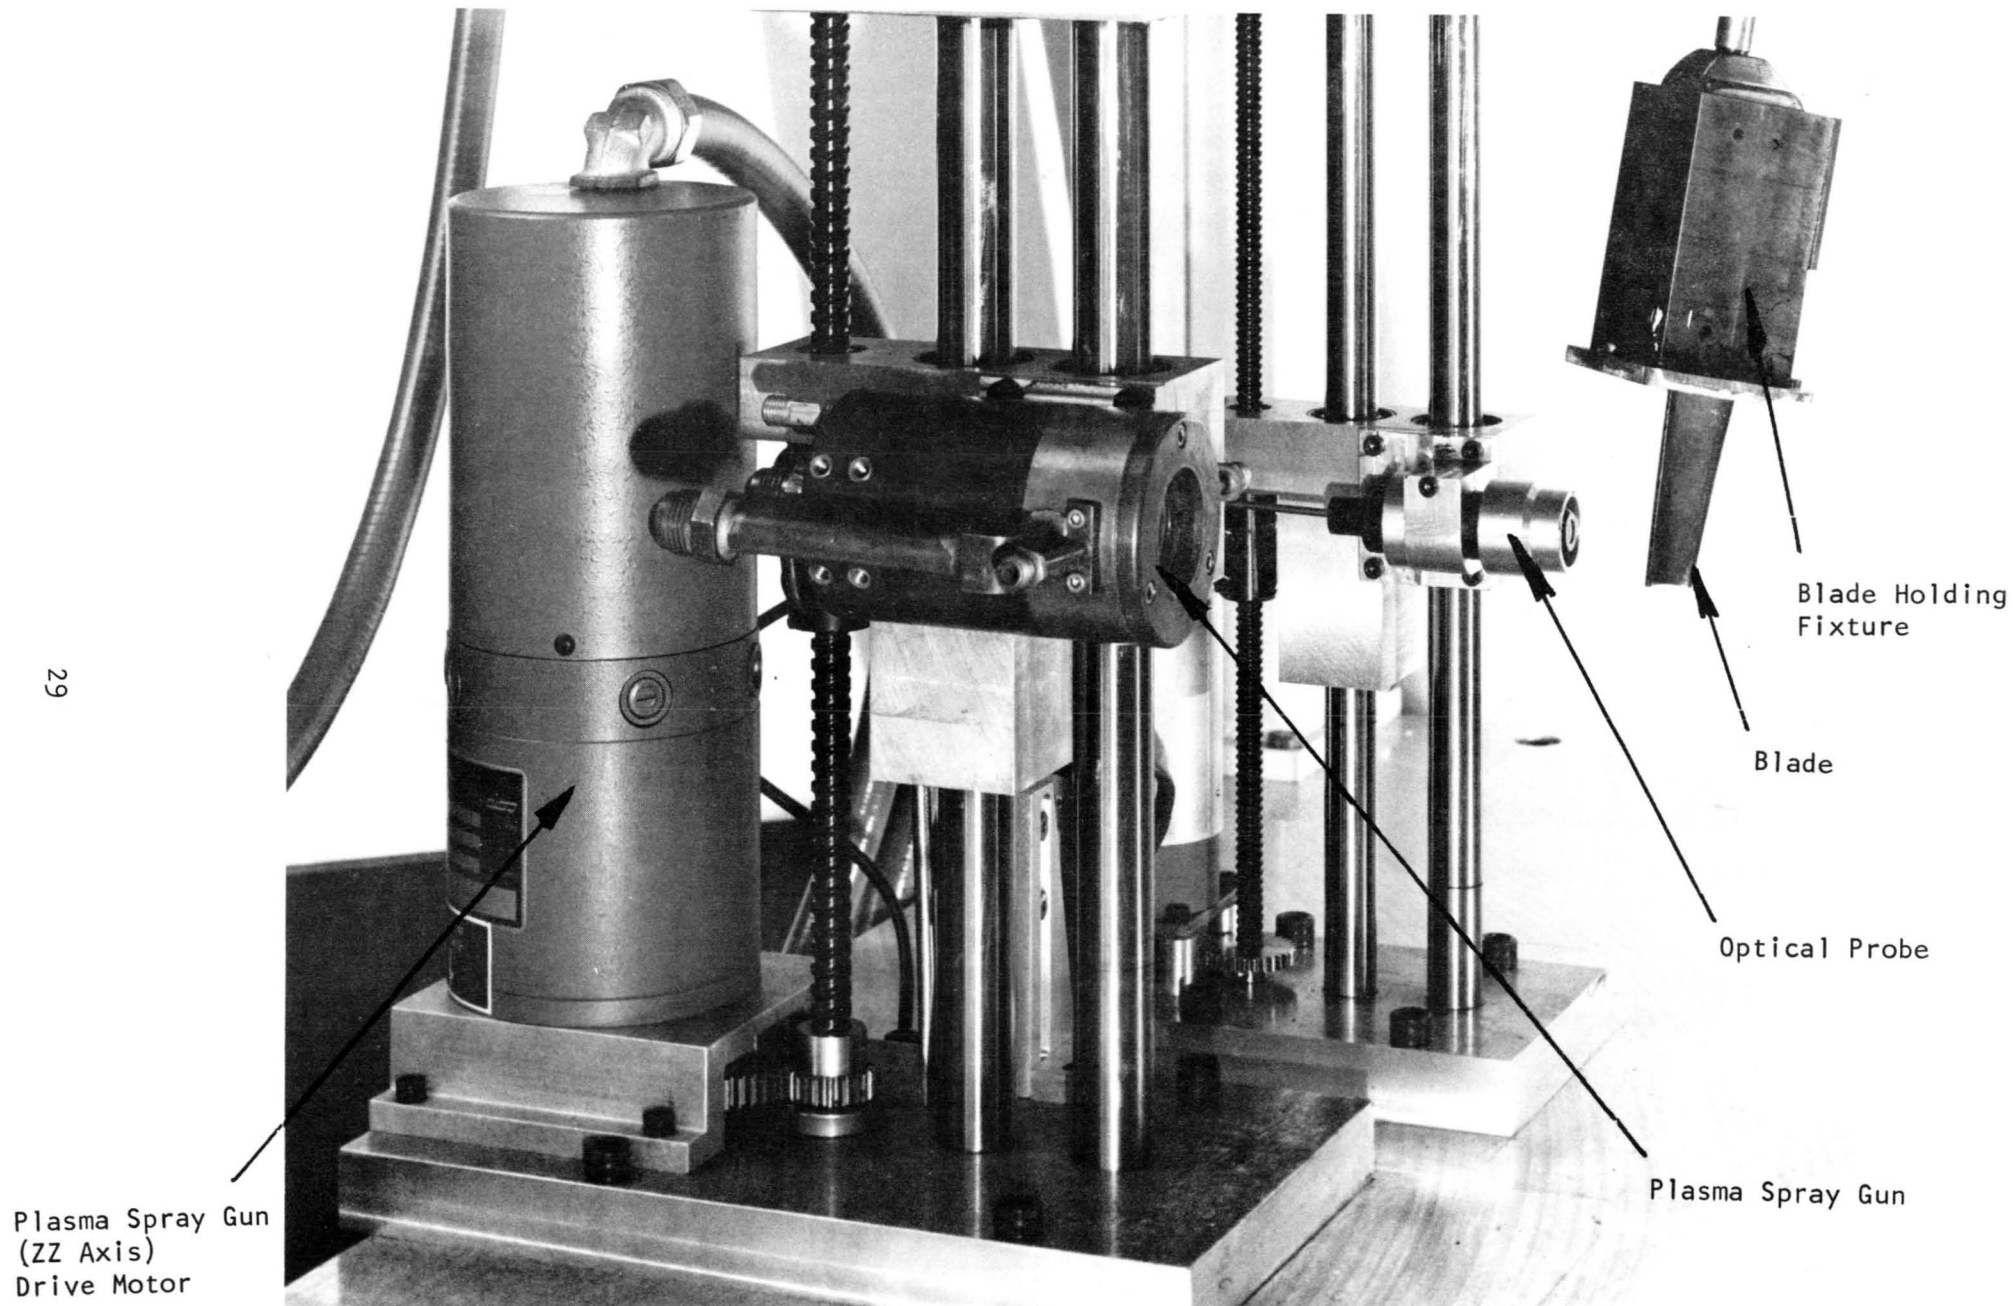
Closeup of Blade and Optical Probe During Gage Point Measurement Routine. Spray Gun Scanning Fixture also Shown in Left Foreground.
